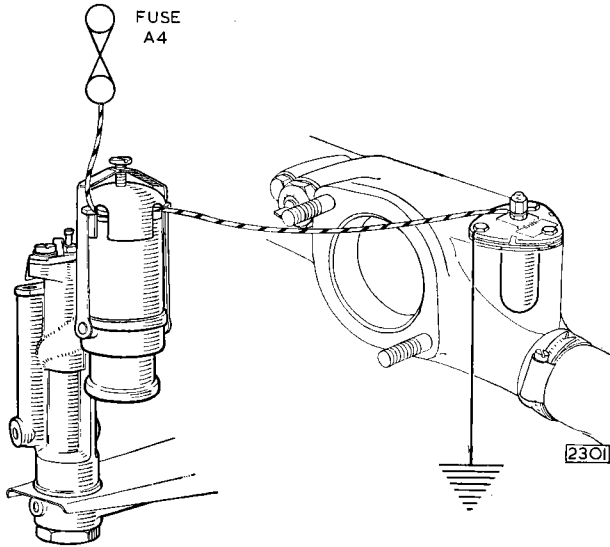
Wiring circuit for the auxiliary starter carburetter to the thermostatic switch
